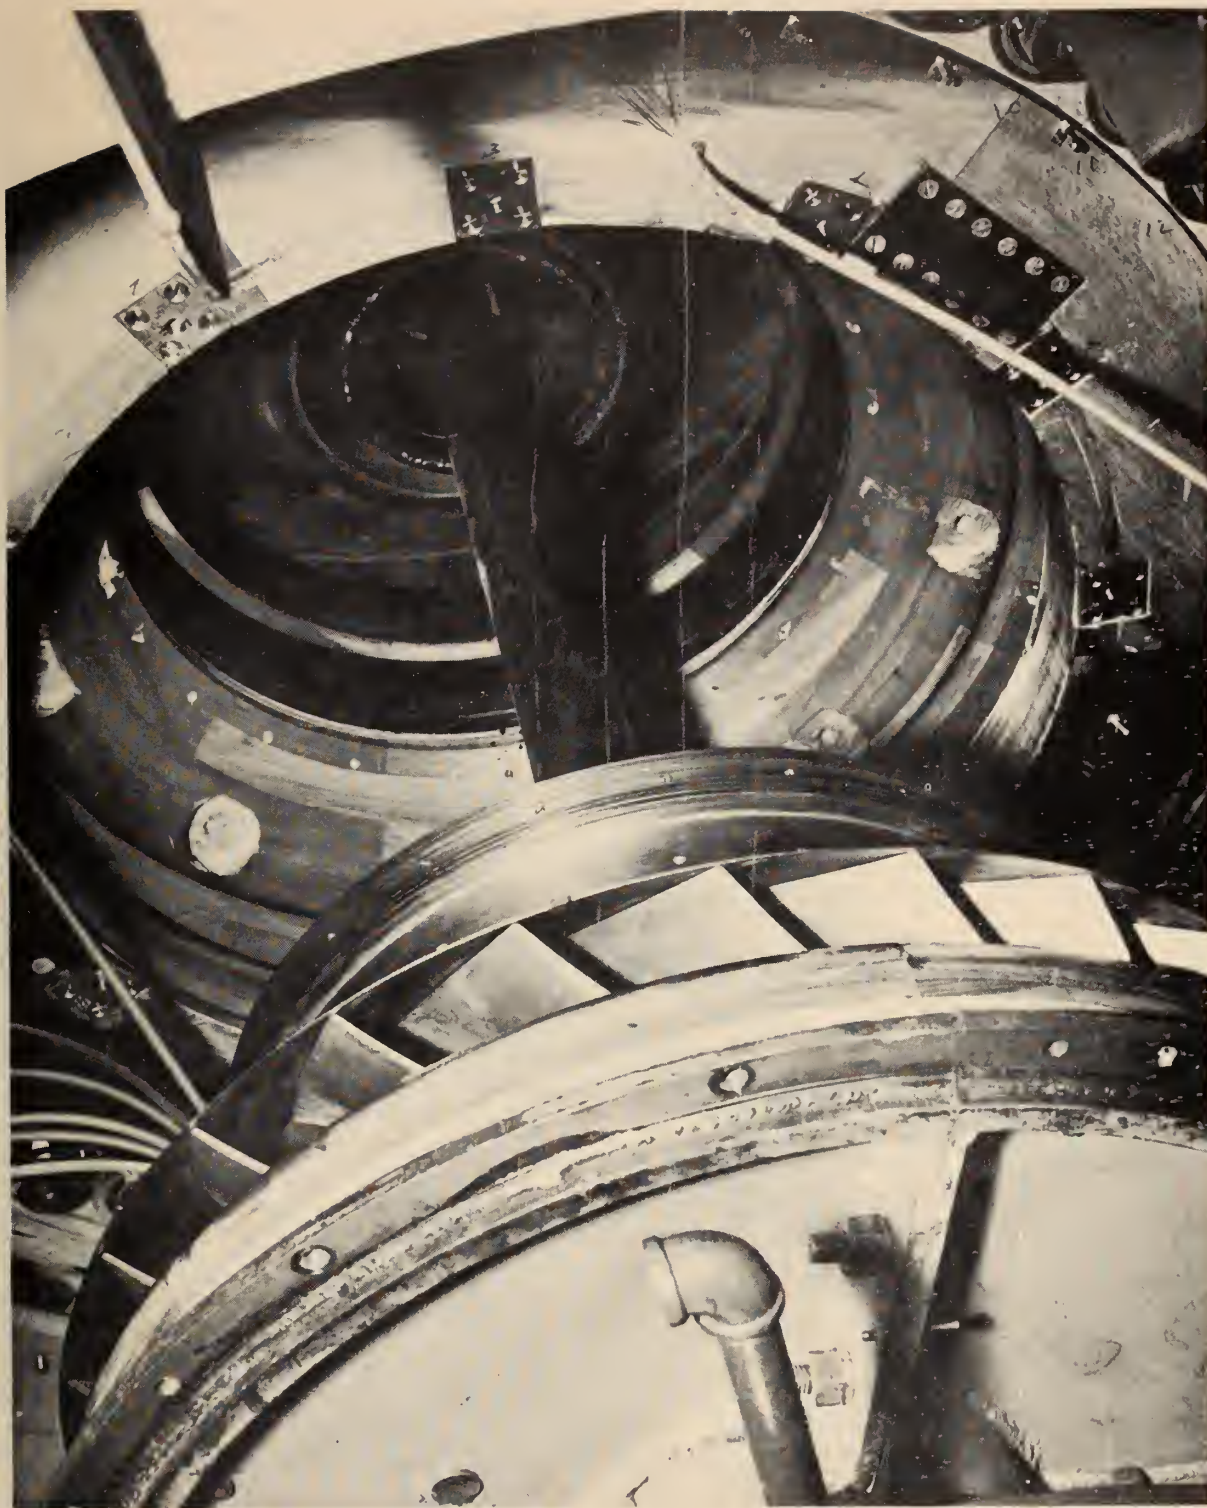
VIEW FROM MOTOR SIDE WITH IMPELLER RETRACTED
